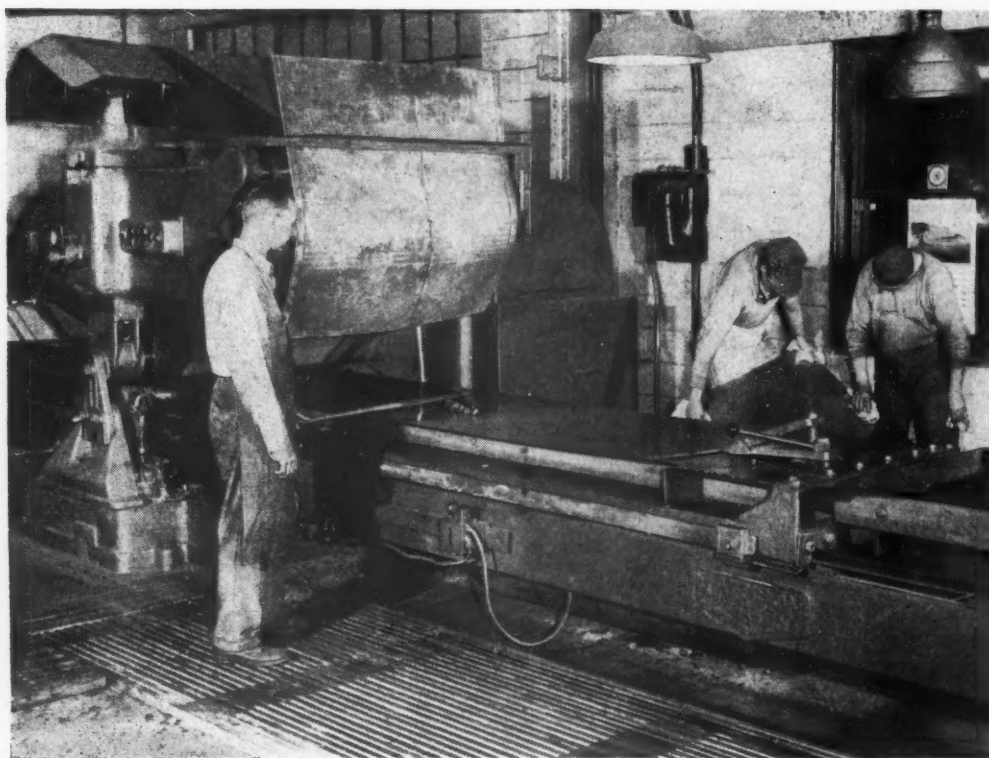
A crew in the act of polishing and inspecting stainless steel sheet. The polisher shown was the first piece of equipment to go into operation.
